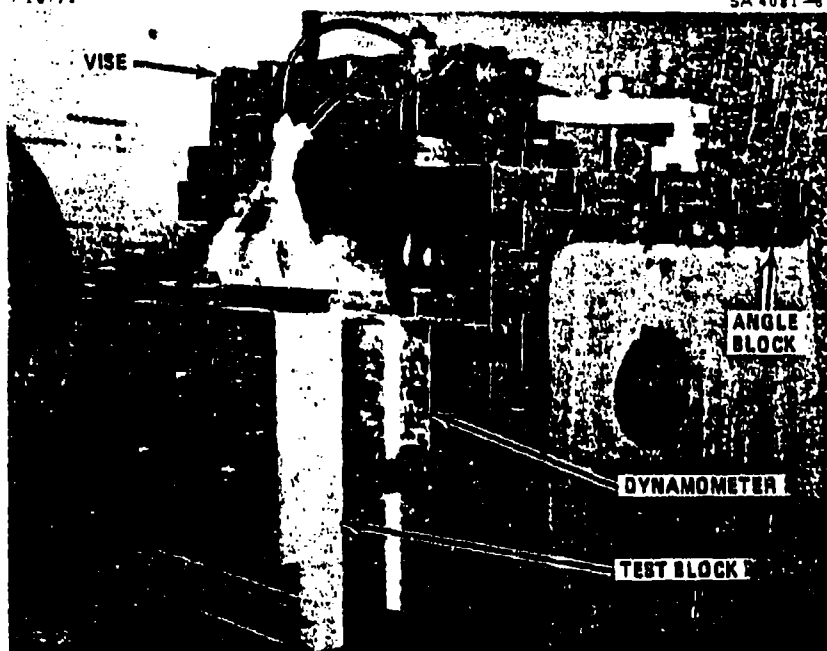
Three-Axes Milling Table Dynamometer and Test Setup
